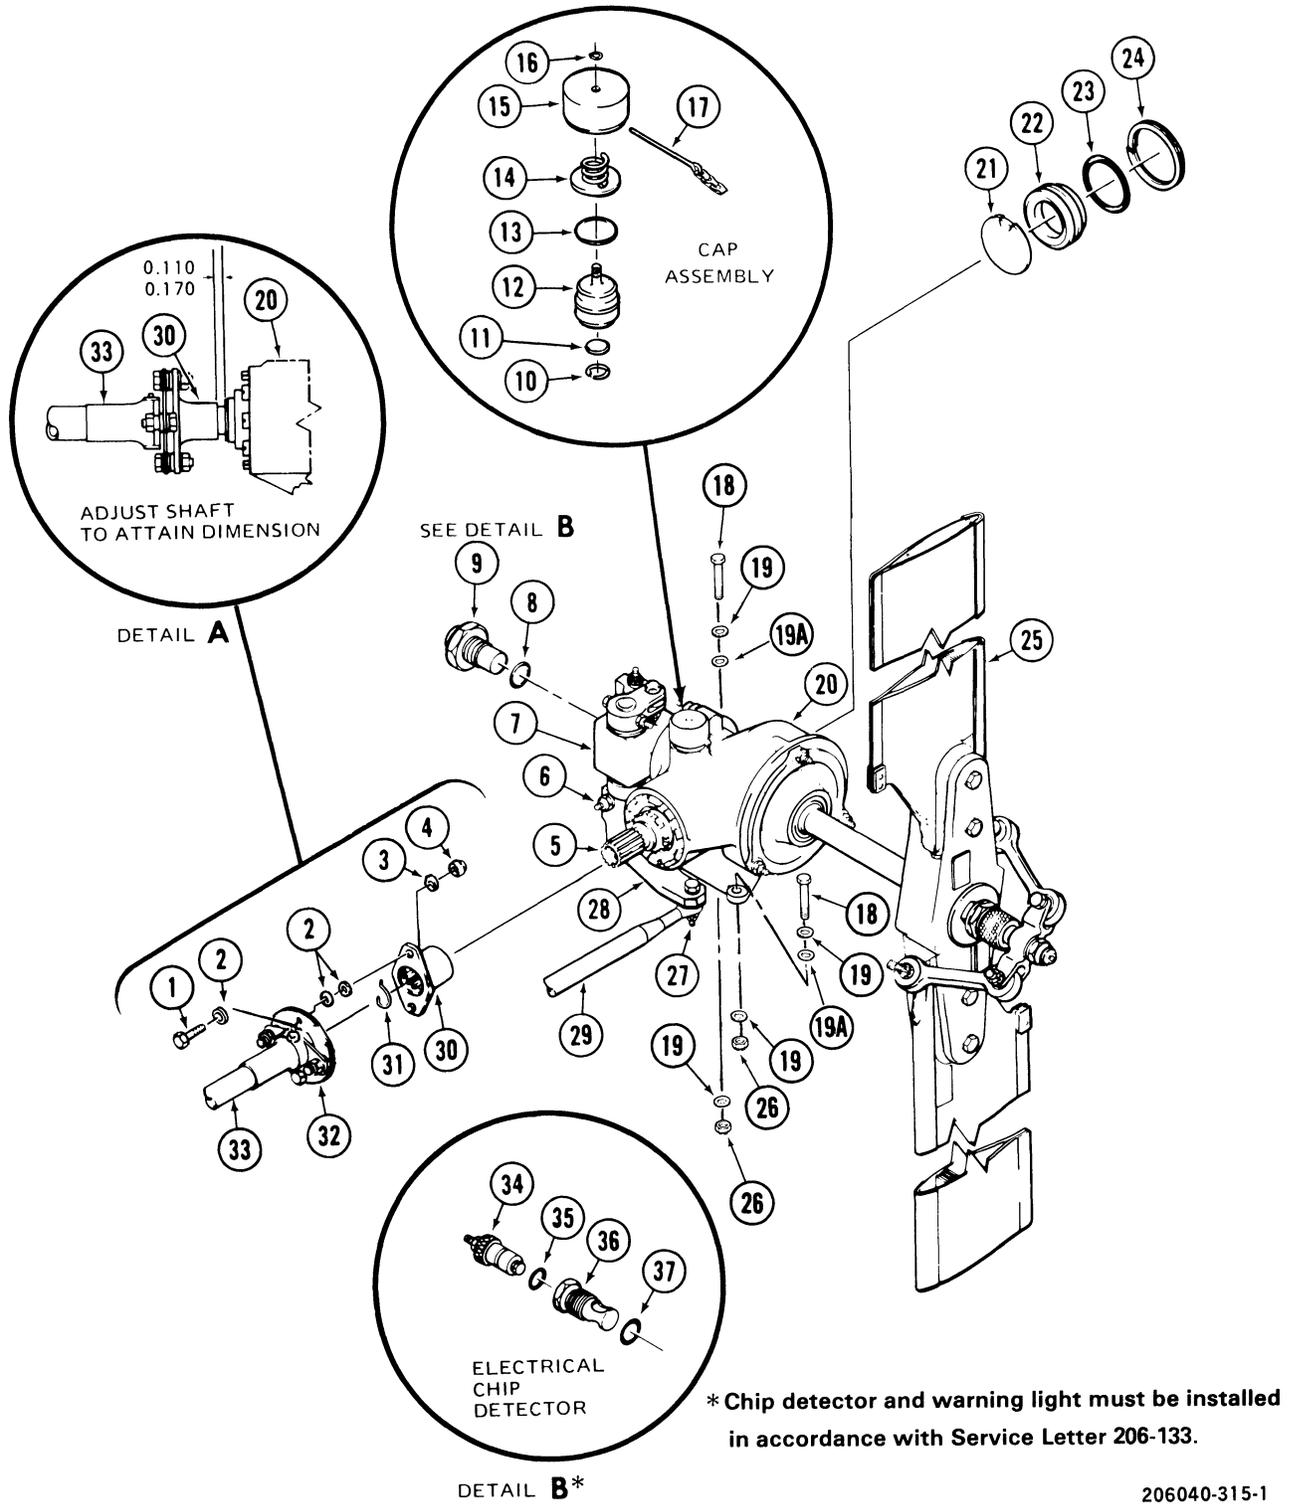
Tail Rotor Gearbox (206-040-400-003) (Sheet 1 of 2)
